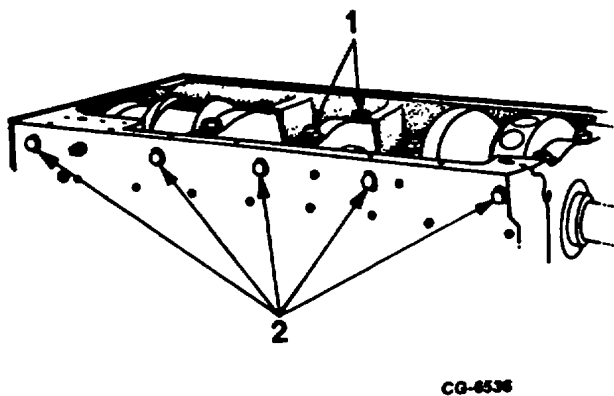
Main Bearing Cap Bolts, Tie Bolts and Washer
